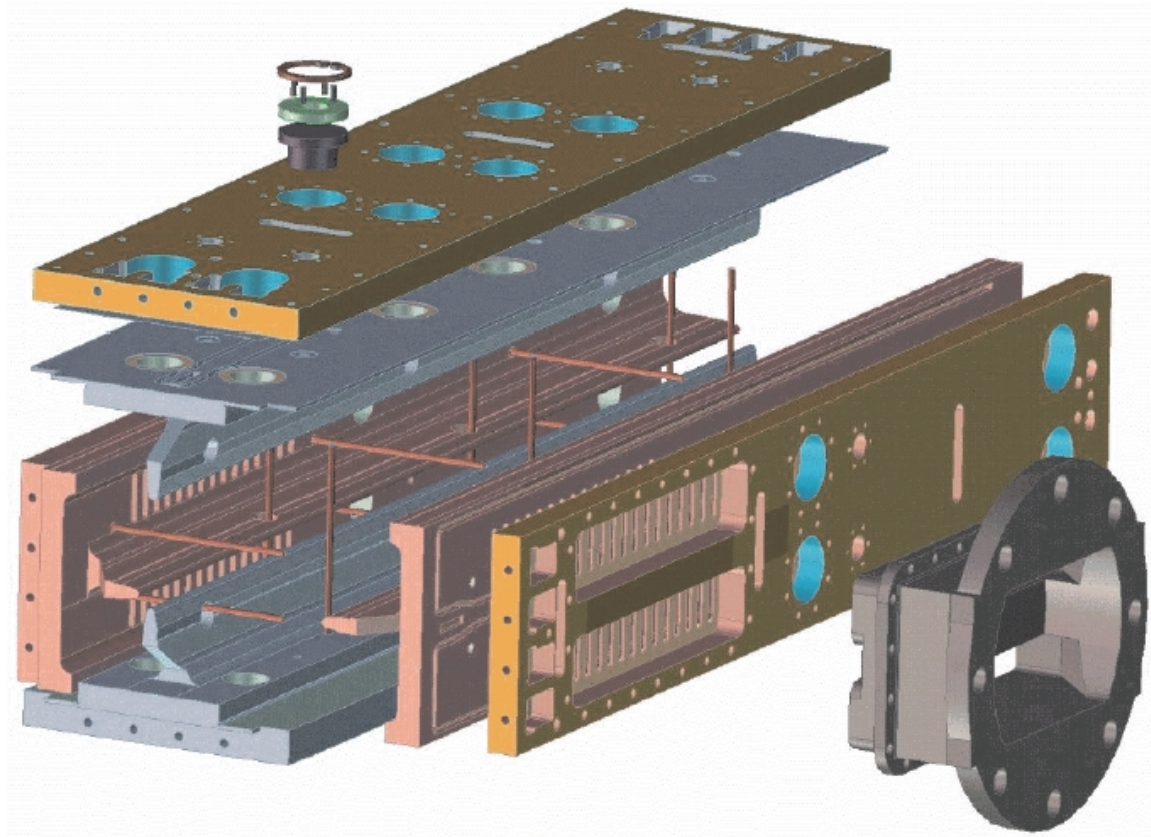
Explosion view of one RFQ module, including one transition flange for vacuum pumping (right) and a slug tuner (top).
